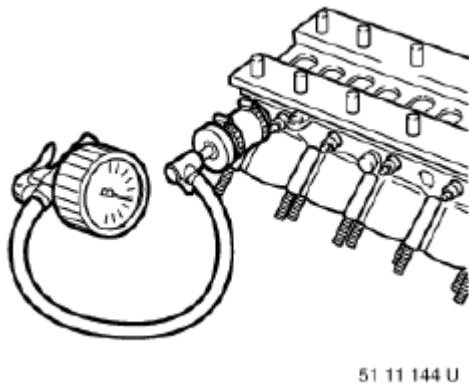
Identifying Special Tool Kit 11 1 440
